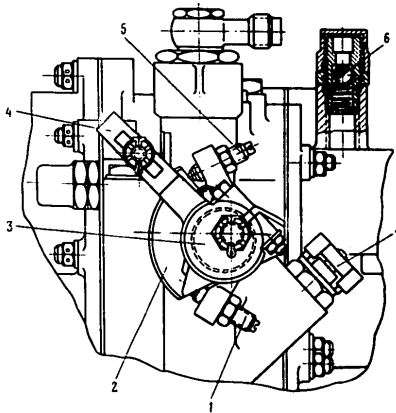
Throttle Valve Lever, Idling Rating Valve and Air Relief Valve Units
